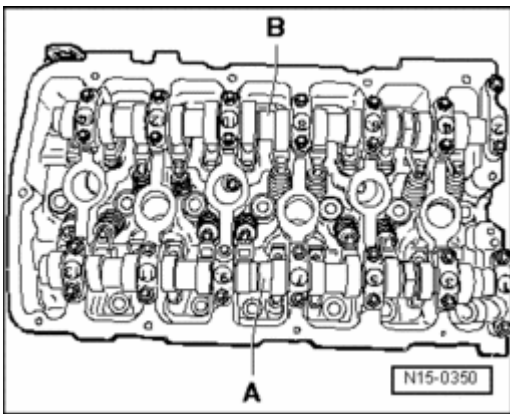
Identifying Intake Camshaft And Exhaust Camshaft
